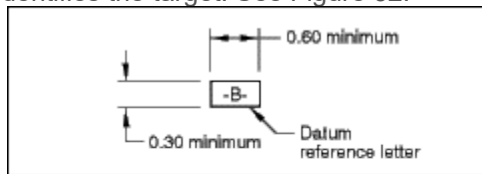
DATUM IDENTIFYING SYMBOL
